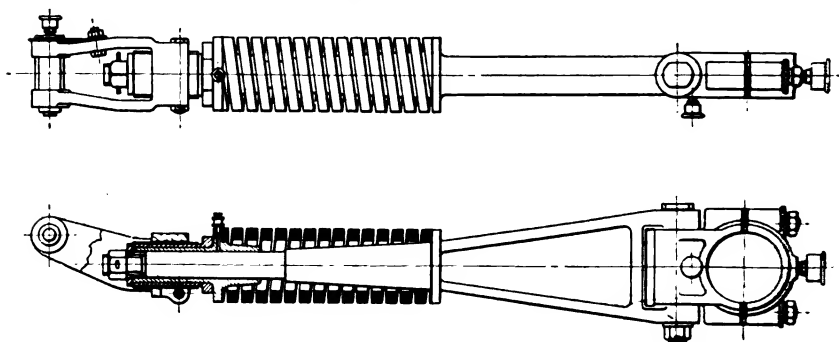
Flexible Universally Jointed Radius Rod for Double Side-Chain Drive
